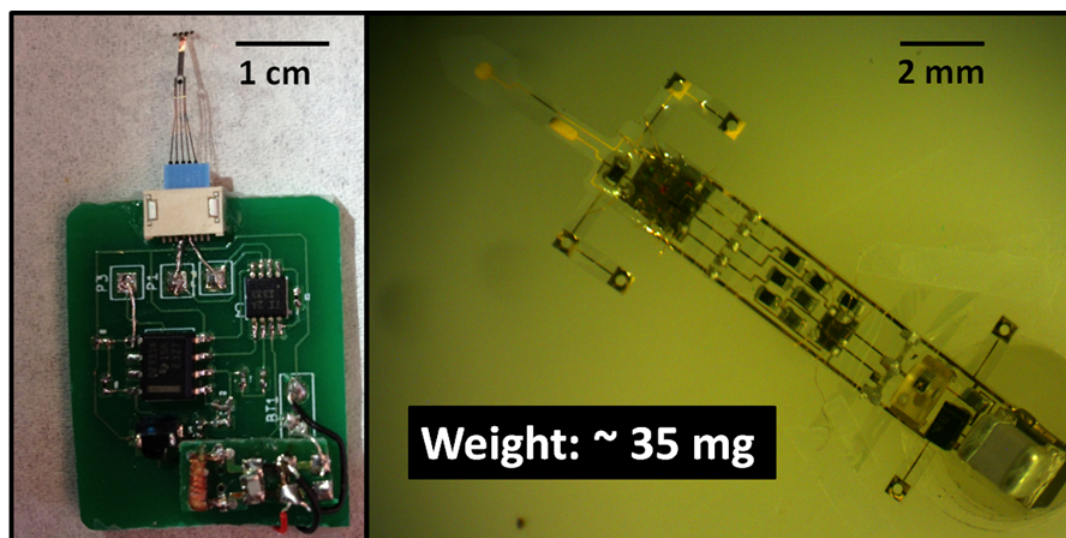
Comparison of the ECG wireless recording system prototyped on printed circuit board and on printed circuit membrane.
